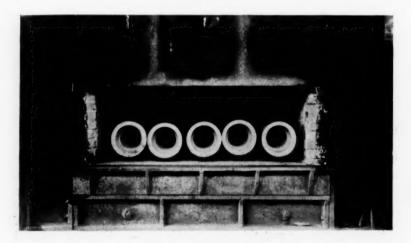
MACHINE-MADE PIPE IN ANNEALING FURNACE
